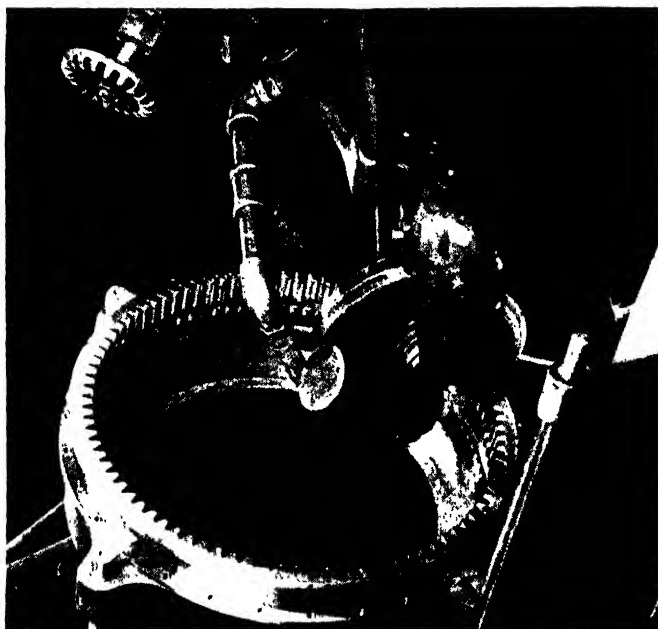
Grinding Teeth of Internal Gear by Formed-wheel Method
